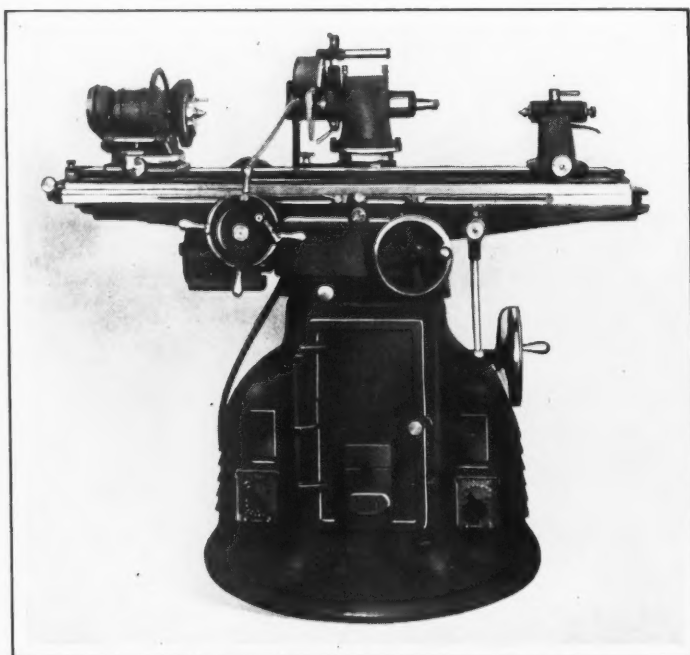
Norton Universal Tool and Cutter Grinding Machine with an Individual Motor for Each Operating Unit
